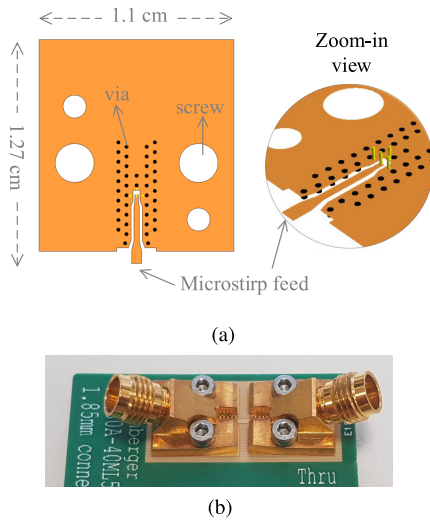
Coaxial connector. (a) Launch-pad layout. (b) Manufactured in back-to-back configuration for measurement.
